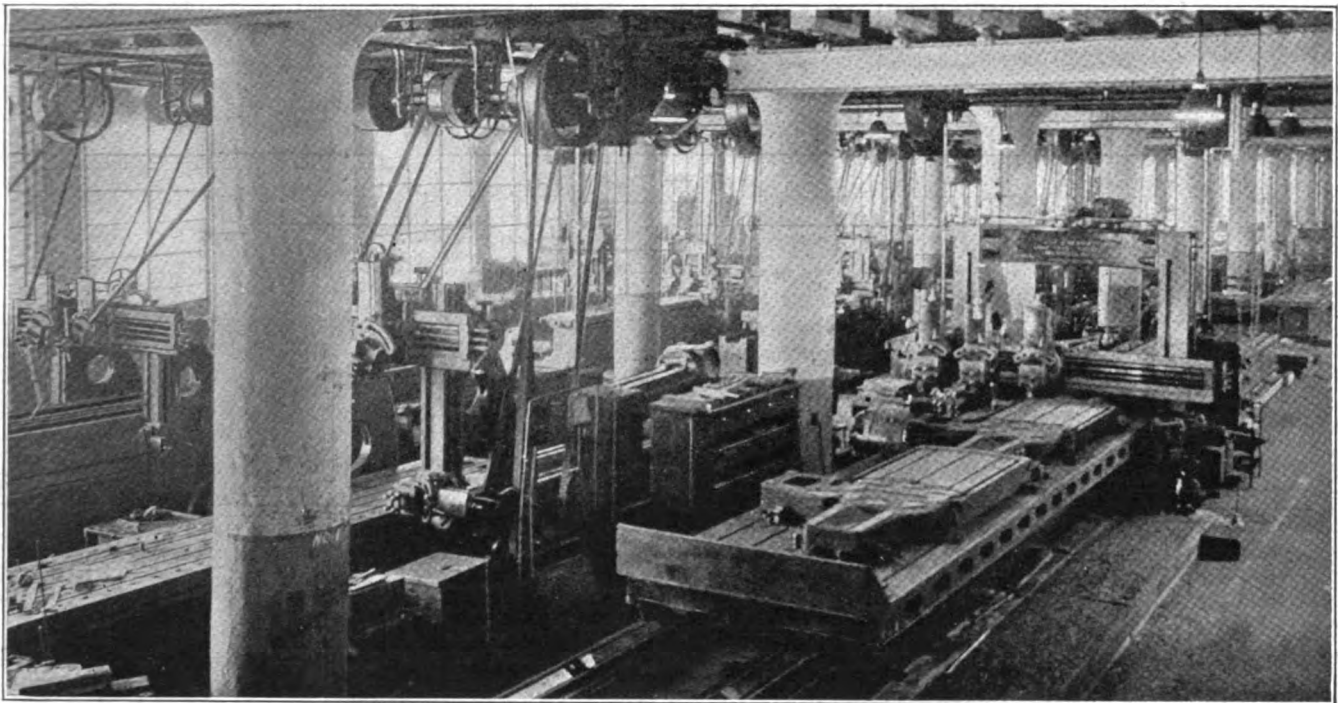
SECOND-STORY PLANER DEPARTMENT
